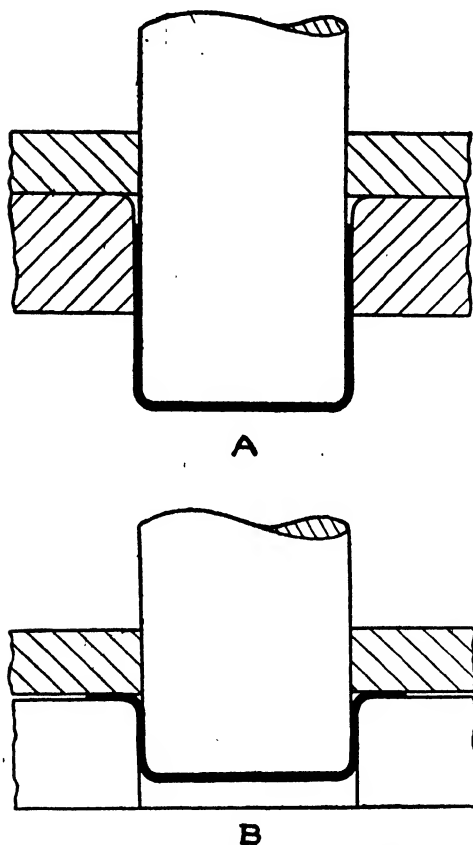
Two methods of using cupping tools of A.E.G. type.
